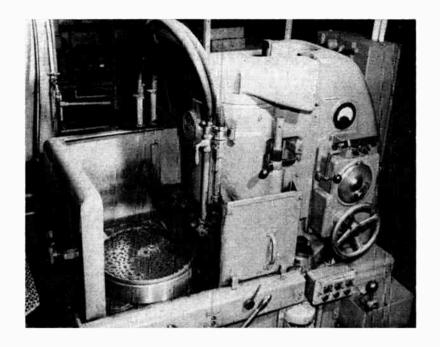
A fine sintered finish required on ferrite parts is obtained by horizontal grinding with #150-D diamond wheels. The sintered parts, being magnetic, are loaded directly on to a rotary magnetic chuck, as shown in the illustration at left.
